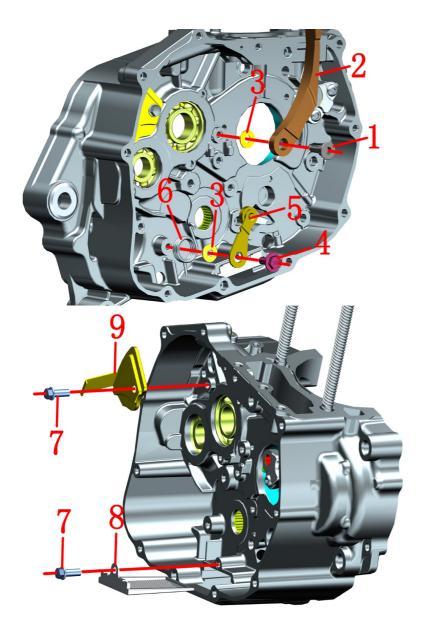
RIGHT CRANKCASE ASSEMBLY		Right box assembly-2	CHK	Q
